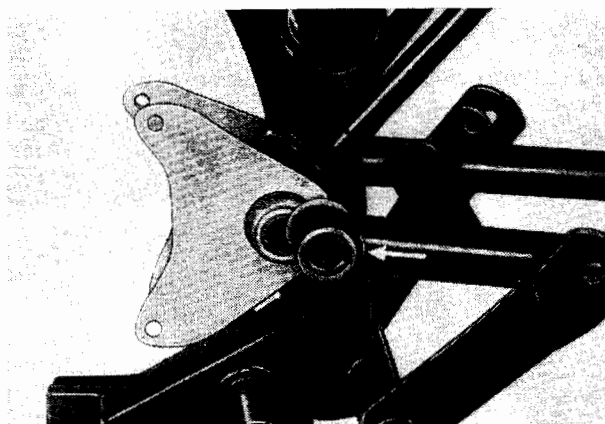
Thrust ring removed, put on the rear wheel swing together with thrust washers in the direction of the arrowhead up to the centre of the bore-hole
